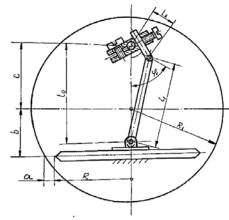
Dimensional parameters of the aneroid capsule and levers mechanism
